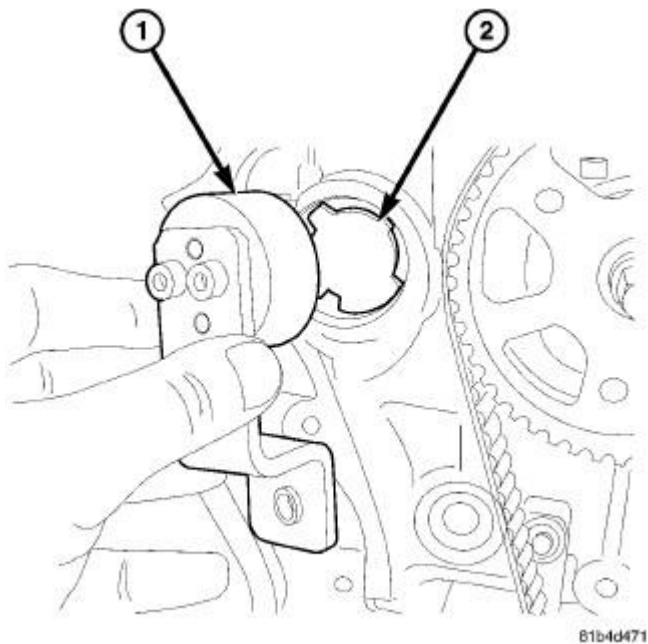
INSTALLING CAMSHAFT LOCK TOOL
